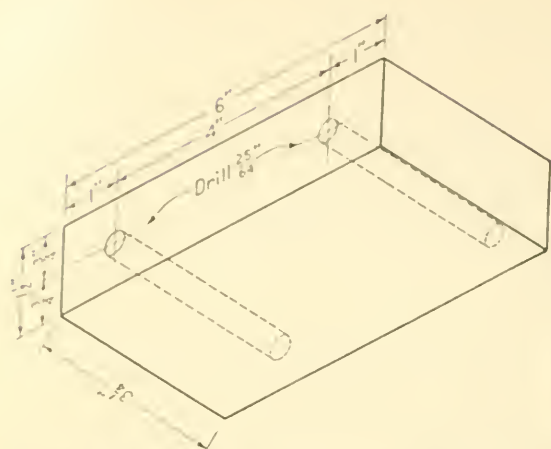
Support block for special chain board, Case-Osborne corn binder
